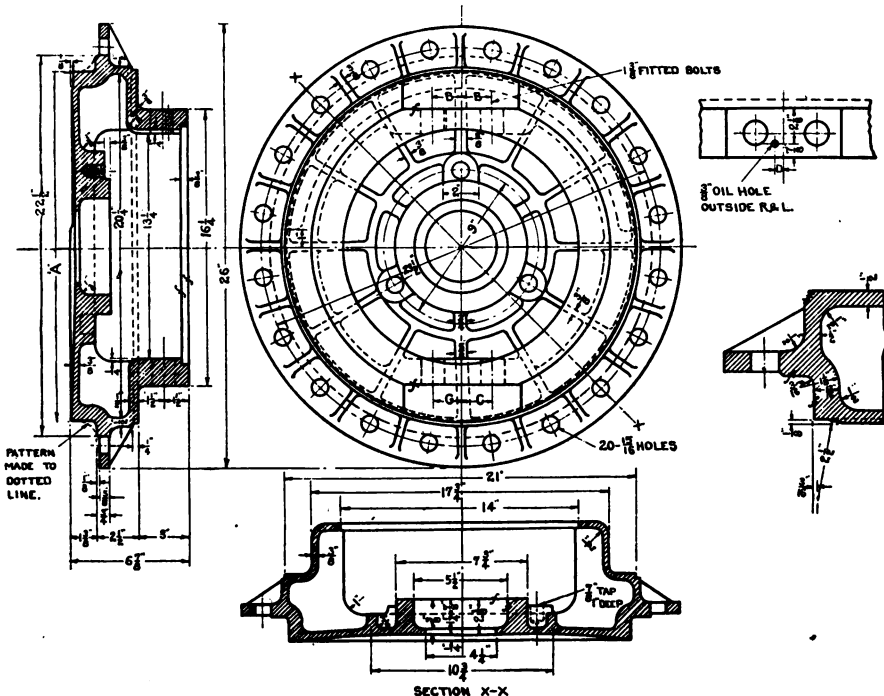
Sketch of Pattern for Locomotive Cylinder Head.
